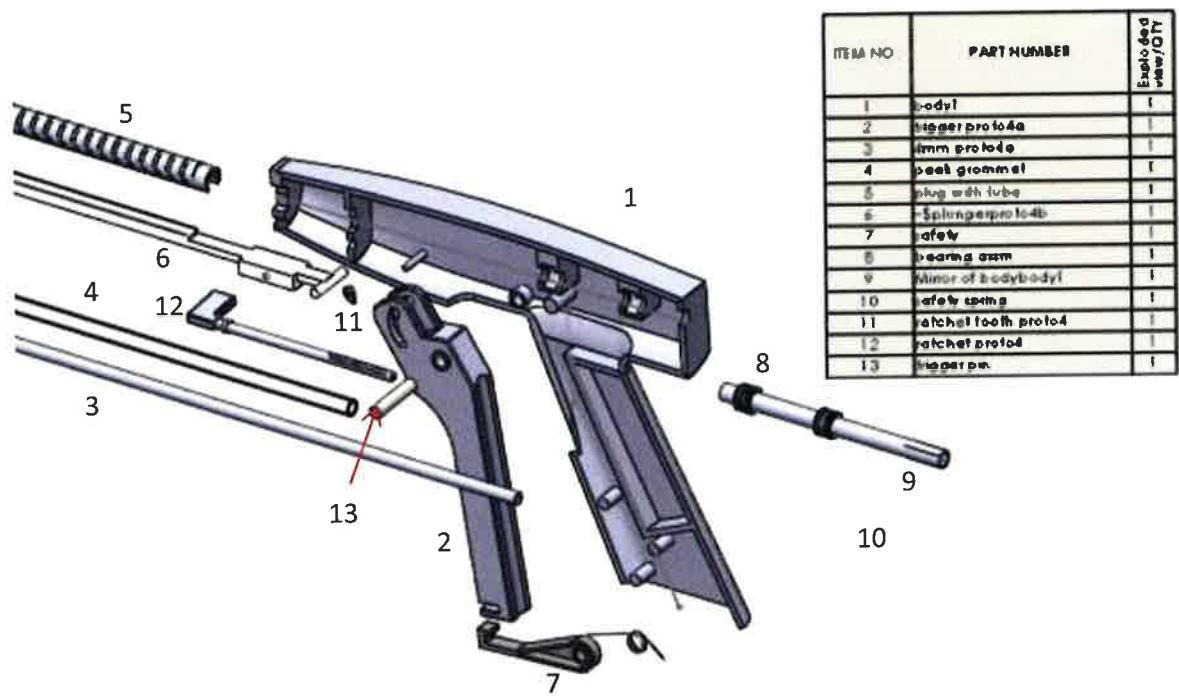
The proximal components of the directional reamer assembly are shown above. The mating shroud, trigger spring, and ratchet spring, and ball bearings have been omitted for visual clarity.
